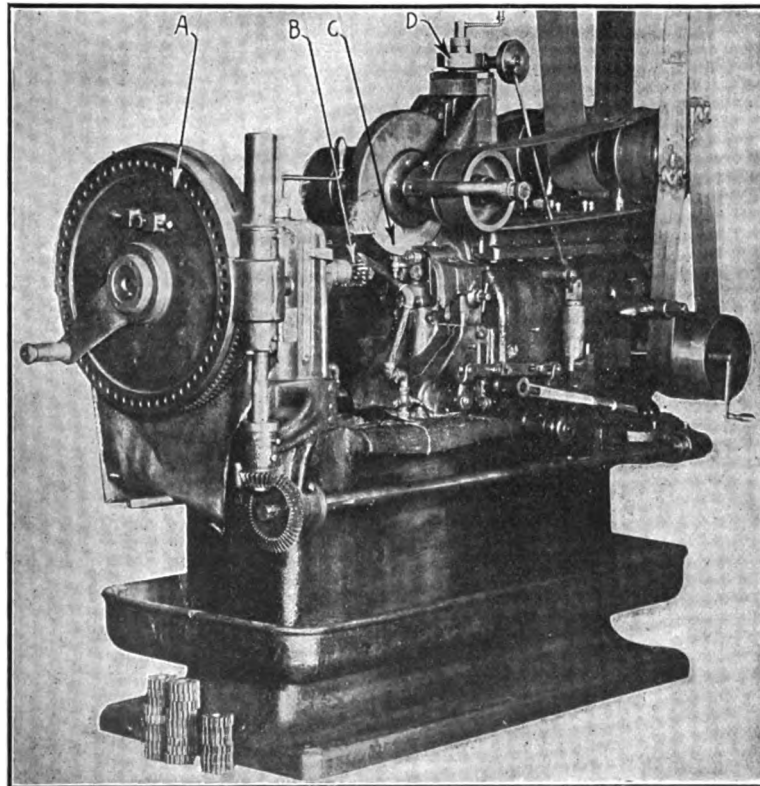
A, indexing wheel; B, gear to be ground; C, grinding wheel being trimmed; D, automatic device for feeding wheel down as it wears away
